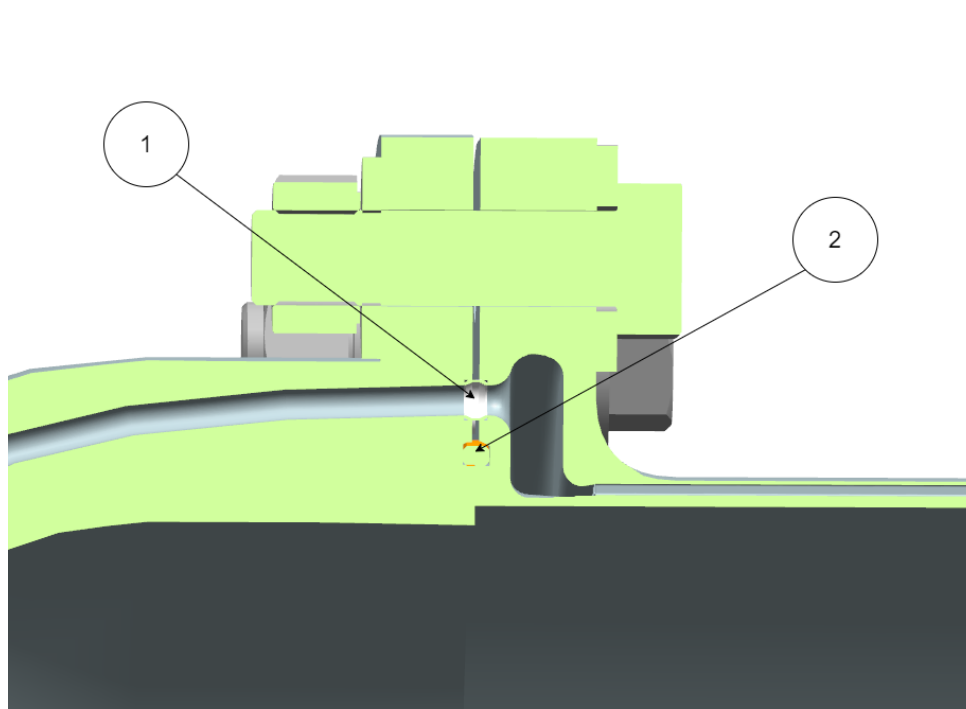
Bolted flange section, 1 - PTFE sealing ring for the oxidizer channels
